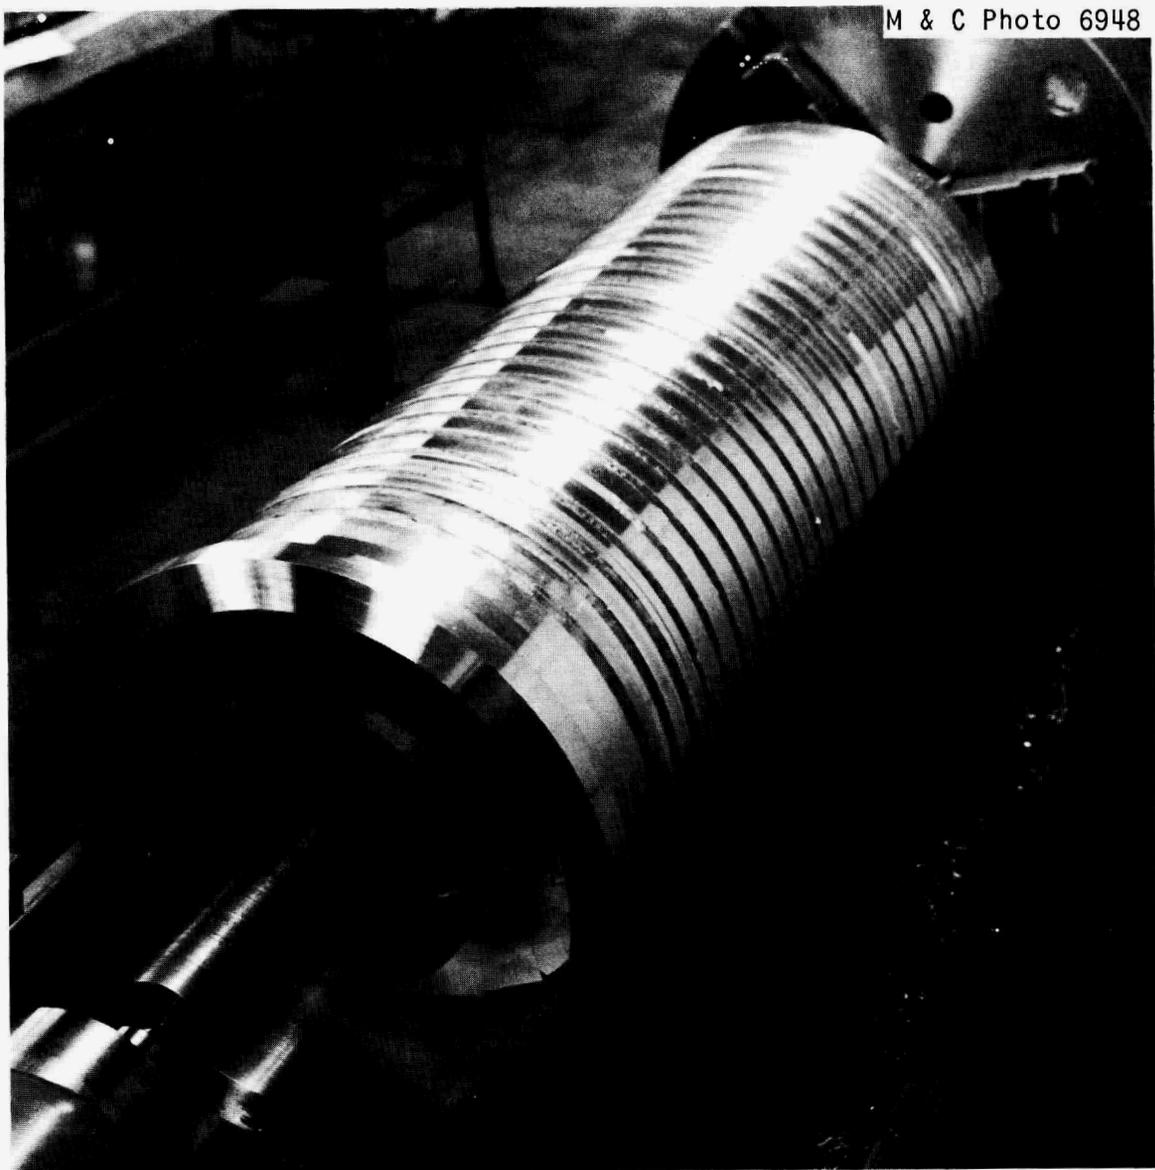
Rough Machining of Adapter on Inner Fuel Element.
